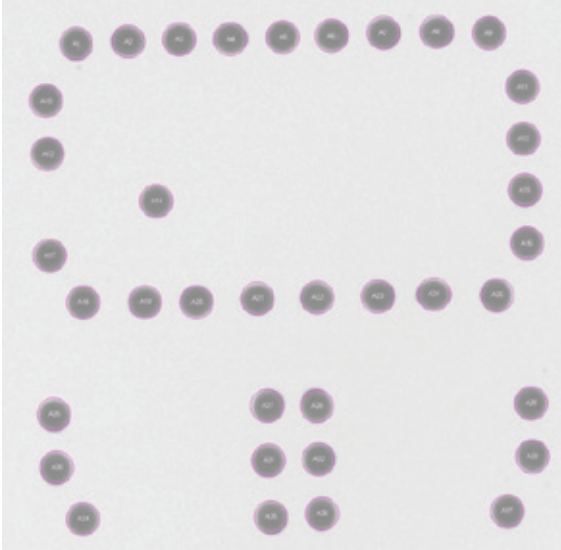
Irregular pattern bumped device – test locations identified using CAD generation tools.
